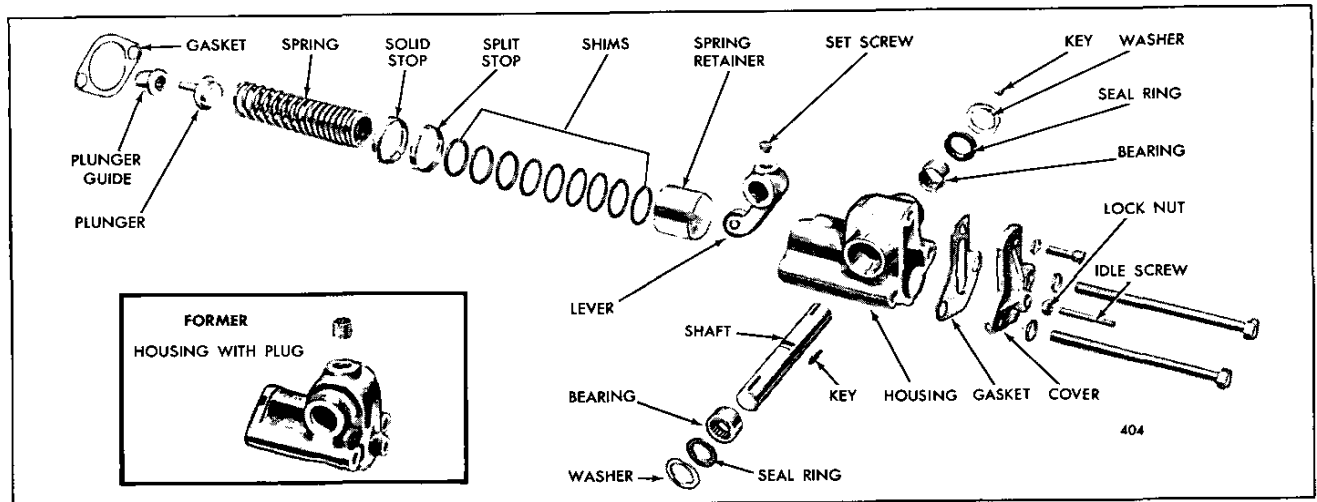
Variable Speed Spring Housing and Relative Location of Parts
